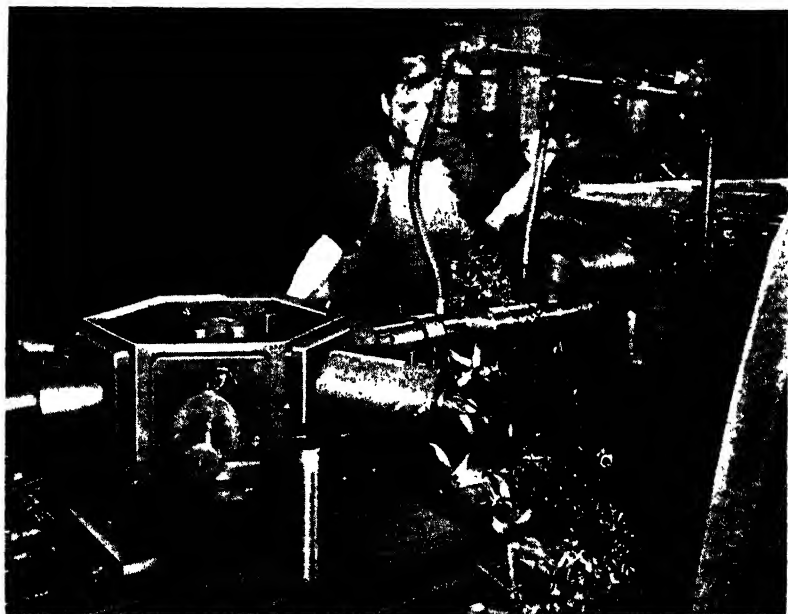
Machining Fuse Heads on an Electric Turret Lathe
